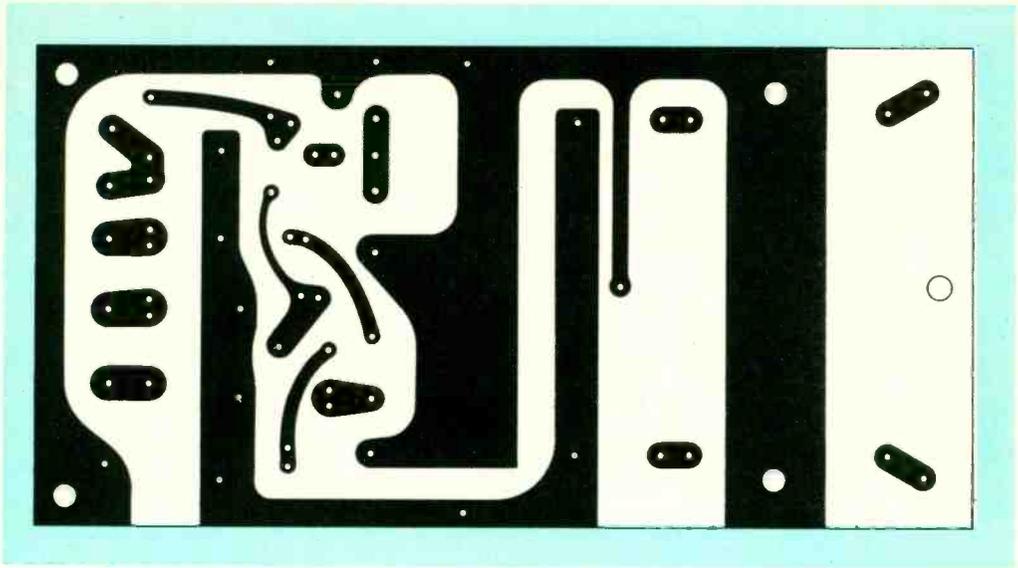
Full-size printed-circuit board template. Follow instructions given in text to make pc board.
